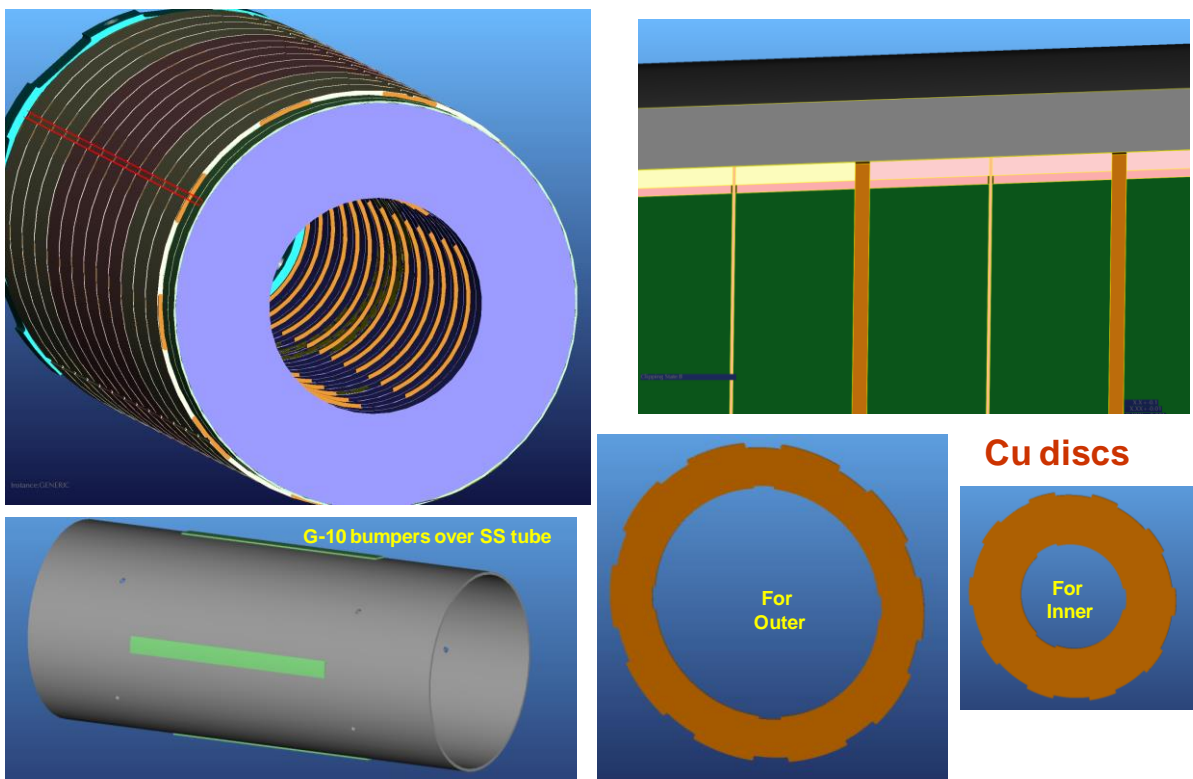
Engineering design of the magnet cooling that minimizes the thermal gradient across the coil.
